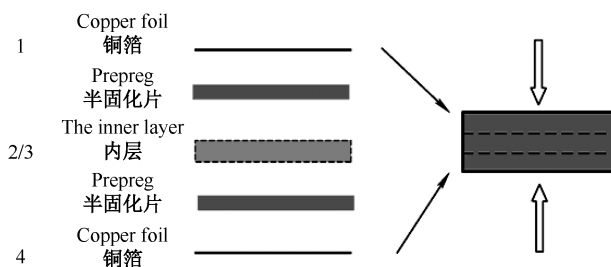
4-layer PCB Fabrication and Lamination 4 层板坯料结构与压制
